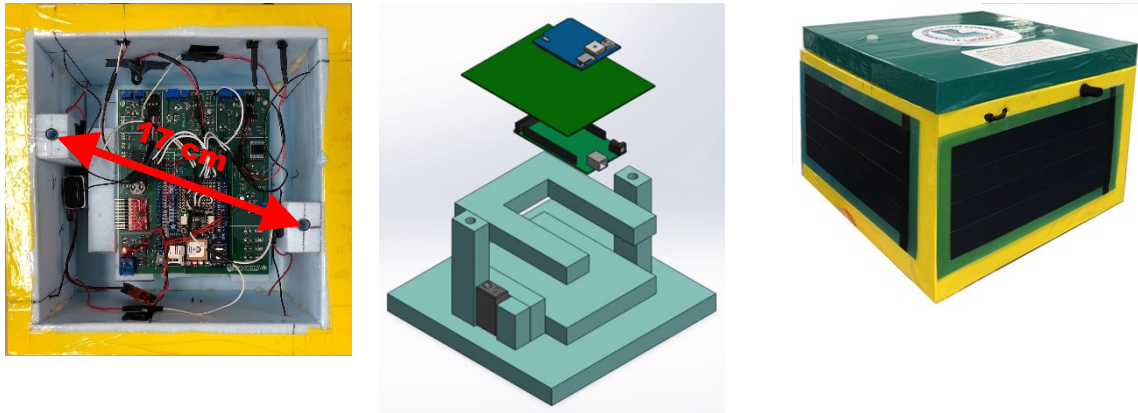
Payload Structure. Left: Top View, middle: Exploded View, right: 3D View
